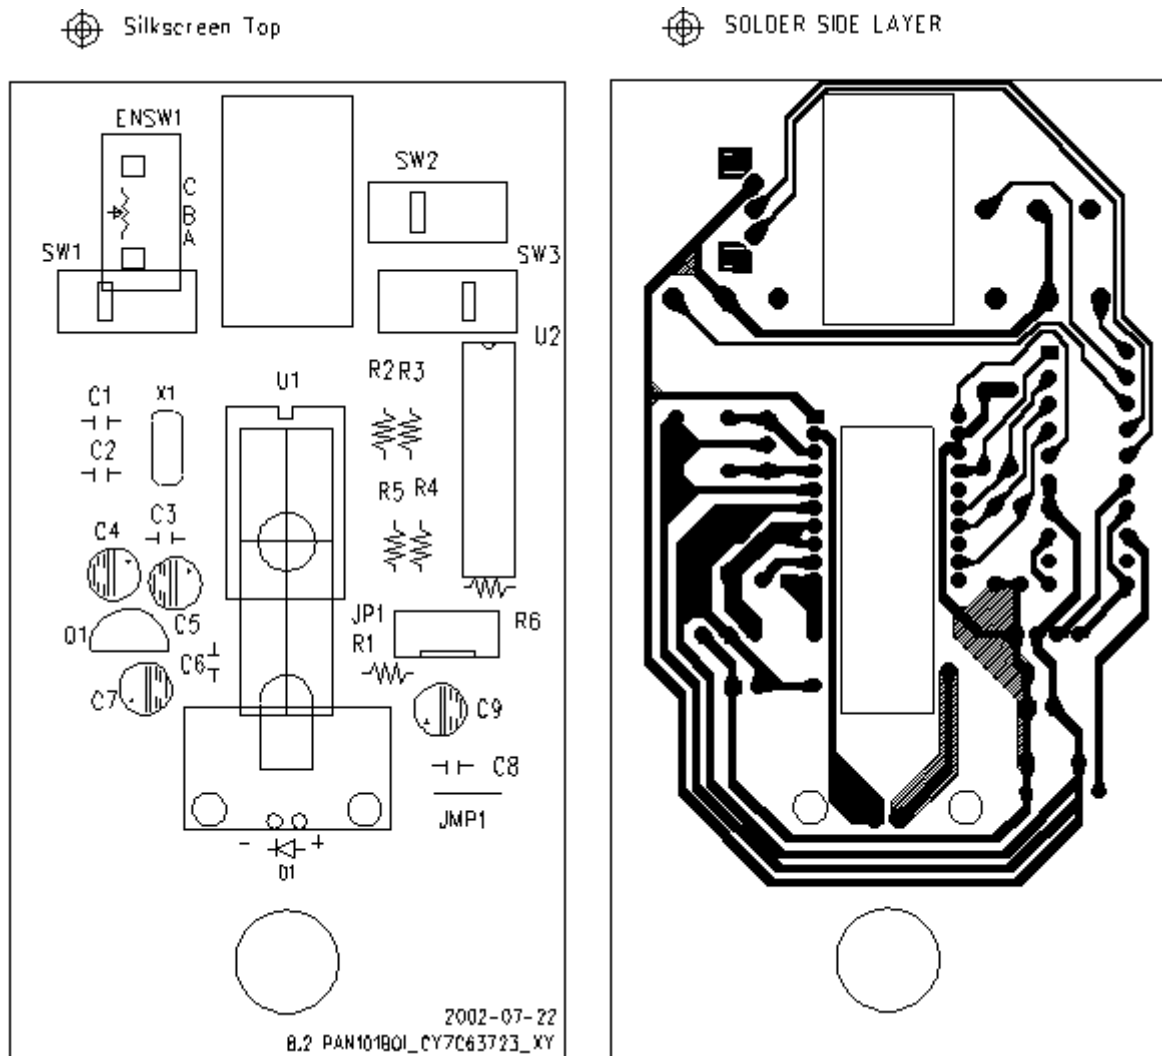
Example printed circuit board layout. (PAN101BOI V.S CY7C63723-PC)
